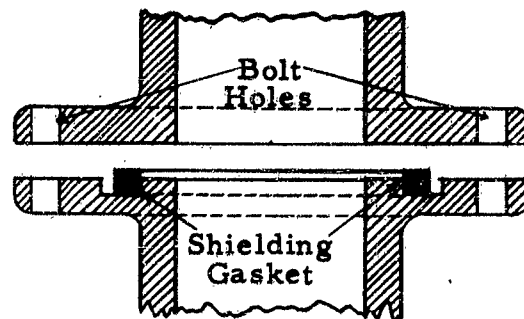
C Use of Conductive Gasket with Flange Joint
